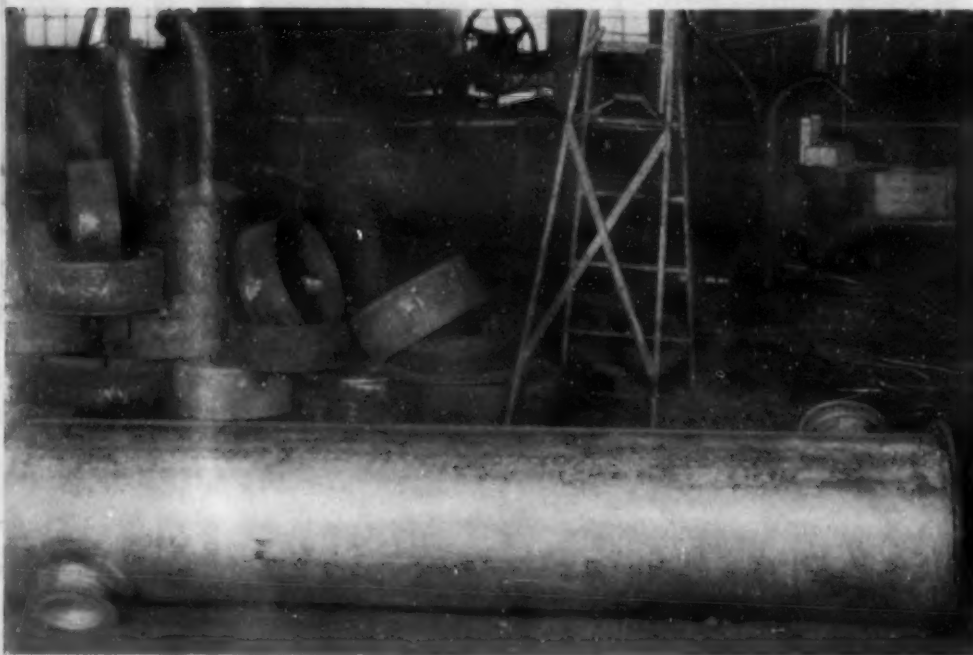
"Sil-Fos" brazed copper heater, 3/16 in. thick 10-in. seam, 6-in. inlet and outlet connections.
